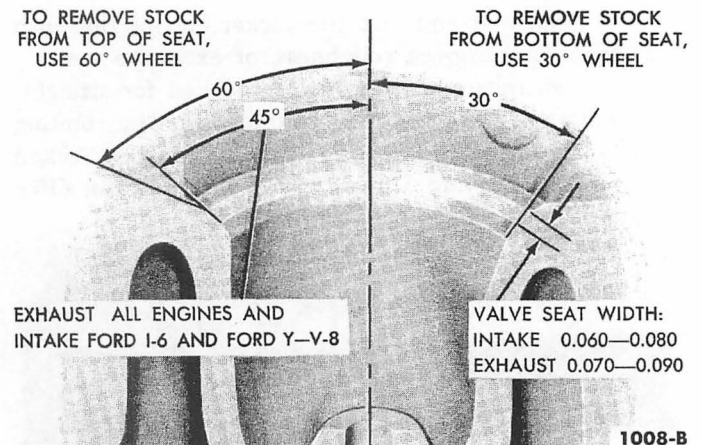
Valve Seat Refacing—Exhaust All Engines and Intake Ford I-6 and Ford Y-V-8 Engines
